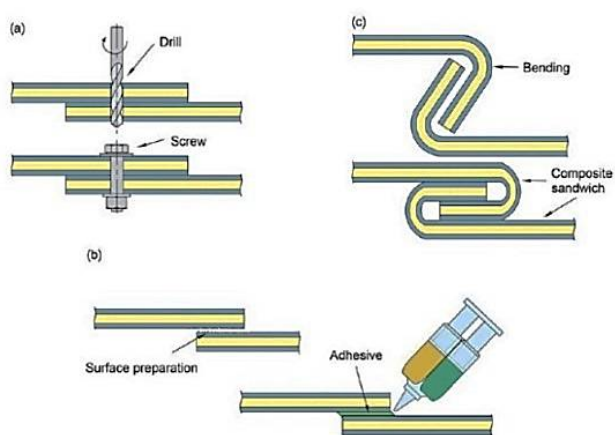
Common methods used for joining of three-layer metal/polymer/metal sheets a) Mechanical fasteners b) Adhesive bonding c) hemming [9]
